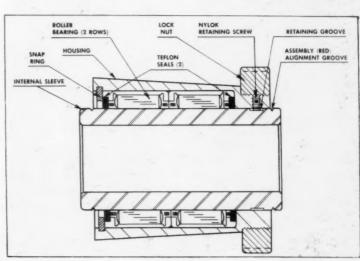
(Left) Sonnet roller-bearing outboard support and adapter bushings for milling machine.
